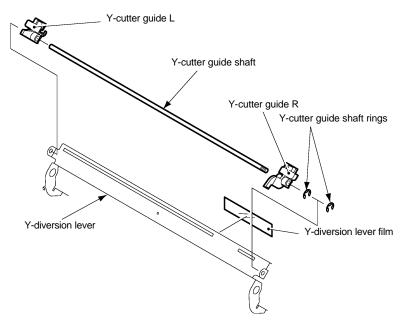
Reassembling the Y-diversion Lever Assy
